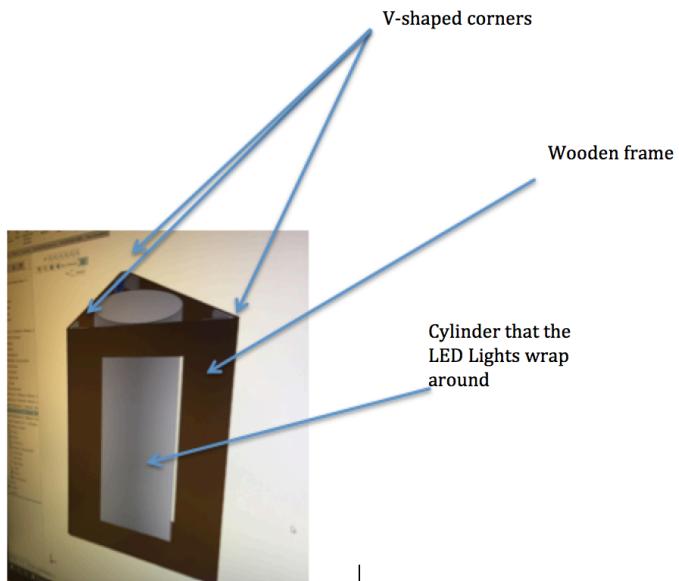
Model of three wooden panels fitting together with V-shaped 3D parts and cylinder
